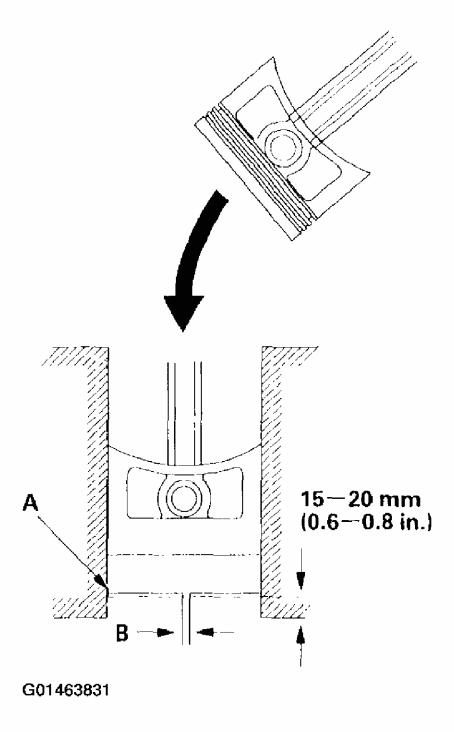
Pushing A New Ring Into The Cylinder Bore
